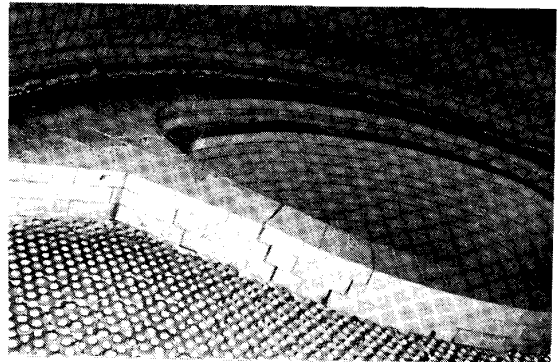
Appearance of No. 5 HS upper part of combustion chamber.
